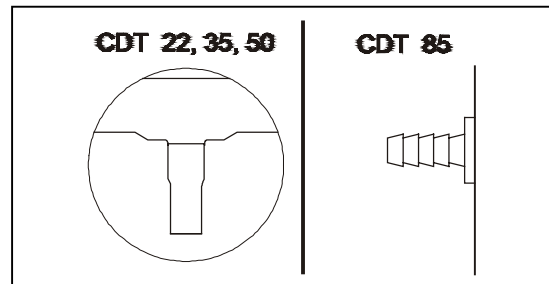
shows the drain outlet of CDT 22, CDT 35, CDT 50 and CDT 85.
